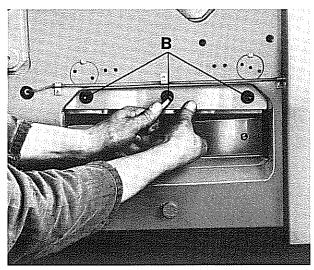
Changing the upper flat steel blade (KBLH 300)
